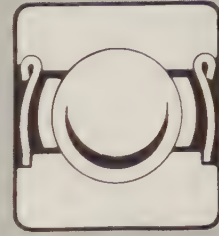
Metal Slinger Labyrinth-Type Seal: This seal is used where low torque, high speed, or high temperatures exist. The seal is constructed of two members rigidly fastened to the outer ring between which a steel slinger pressed on the inner ring OD is located. The slinger operates with running clearance with the other metal parts of the seal and permits high-speed operation. Since there is an all-metal seal, temperature limitations applying to rubber or felt do not exist.
